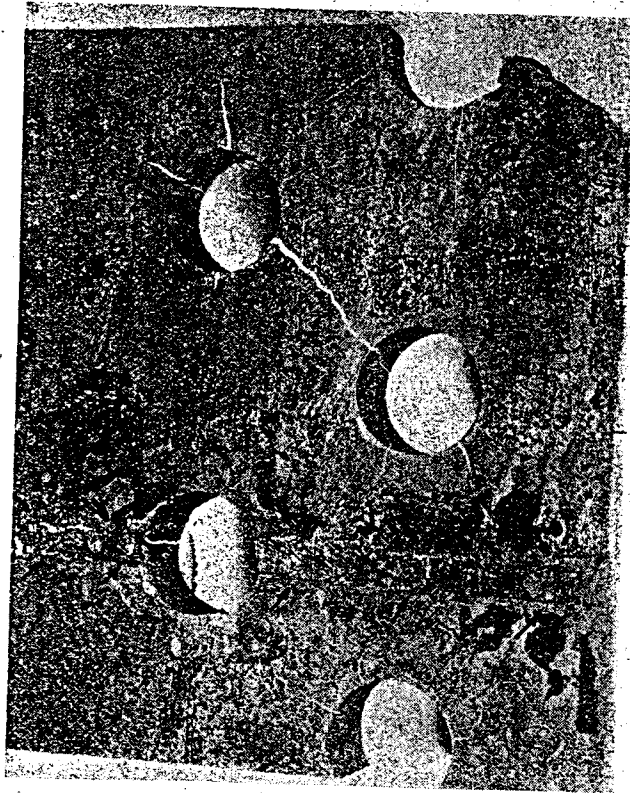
Boiler shell in service five years. Note poor weld and out of round holes.
